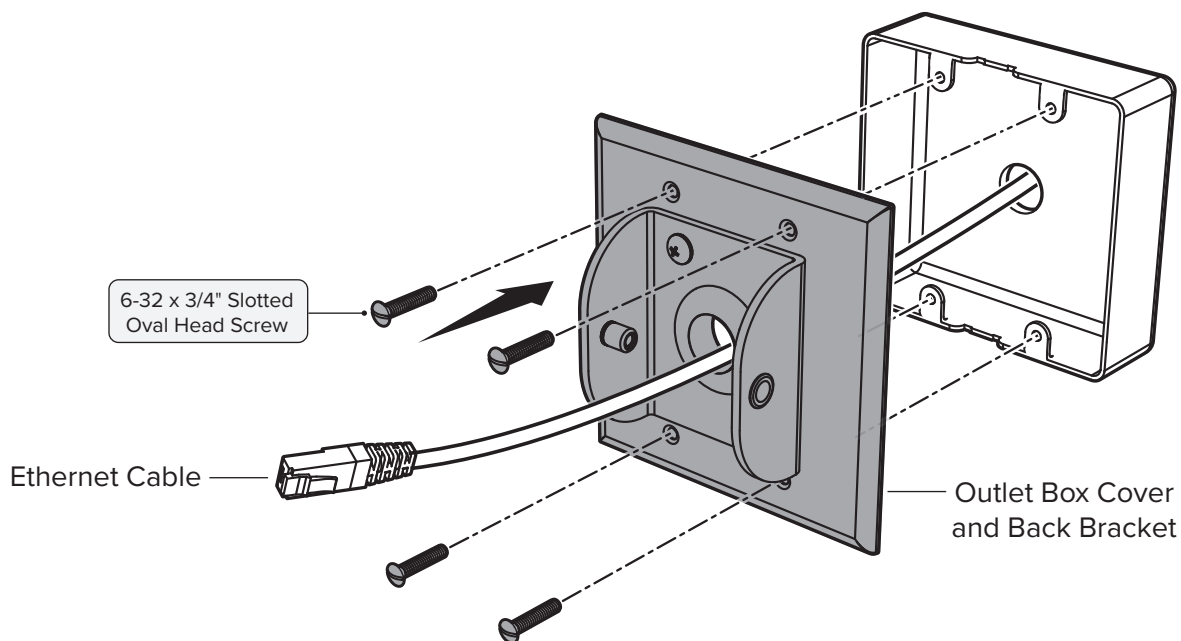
4 x 4 in. (102 x 102 mm) Outlet Box
